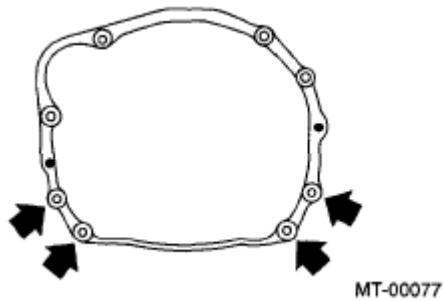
Locating Bolts And Nuts Which Hold Lower Side Of Transmission To Engine - MT Model
